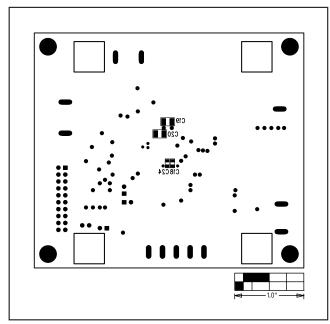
MAX1645B EV Kit Component Placement Guide— Solder Side
